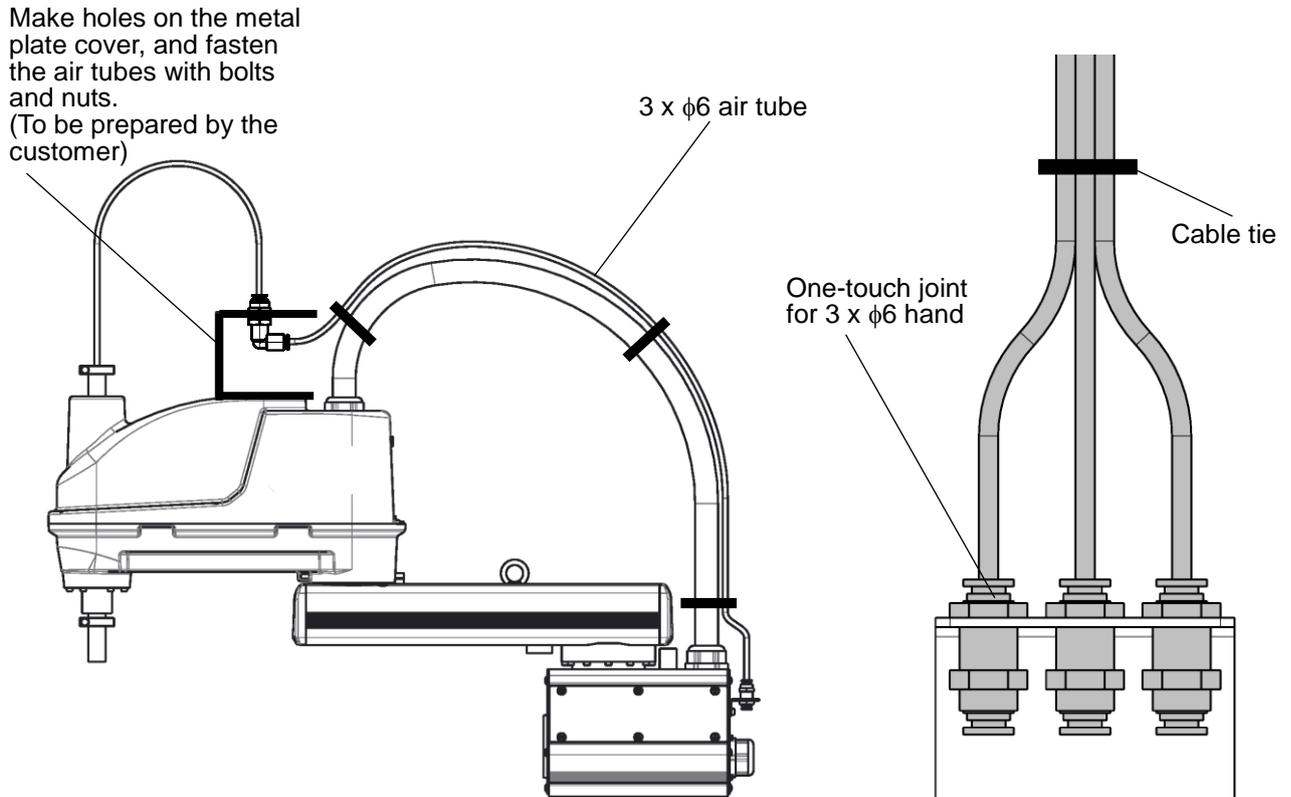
Tool air piping installation example (KHL-500, KHL-600 and KHL-700)
